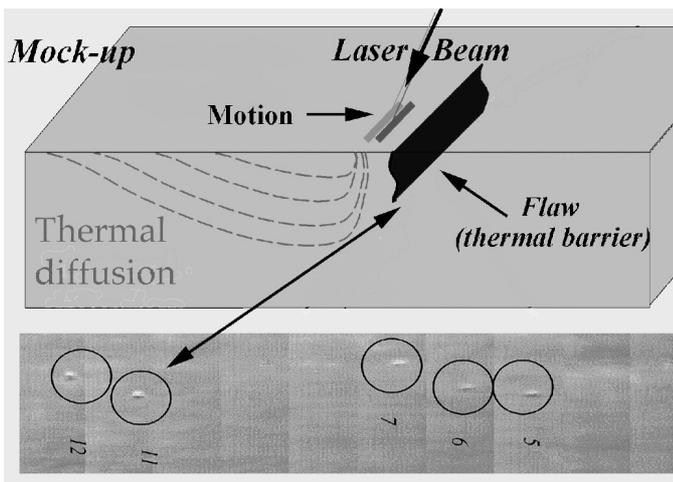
Photothermal camera as a surface crack inspection method and detected defects in a mock-up test (EUPT)
